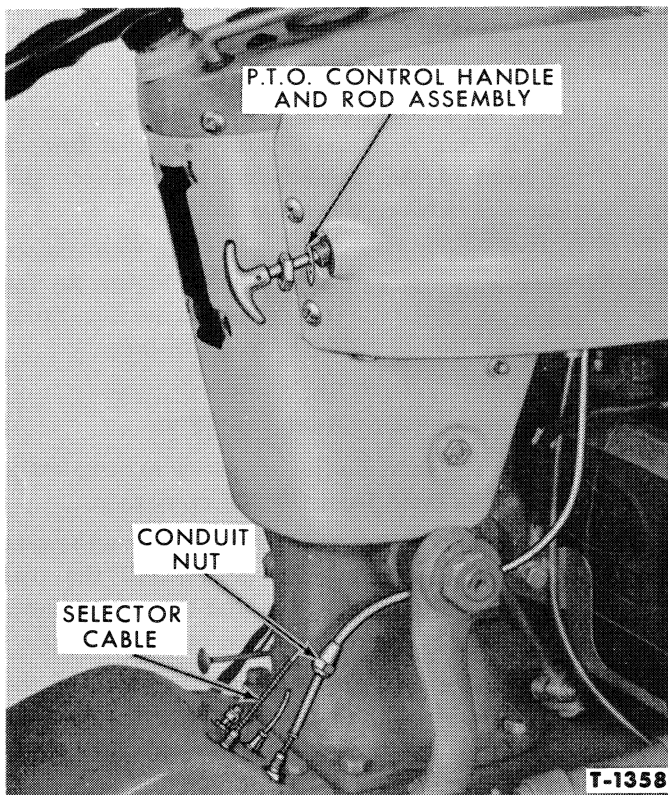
Removing the P.T.O. Control Assembly—Models 71 and 81
